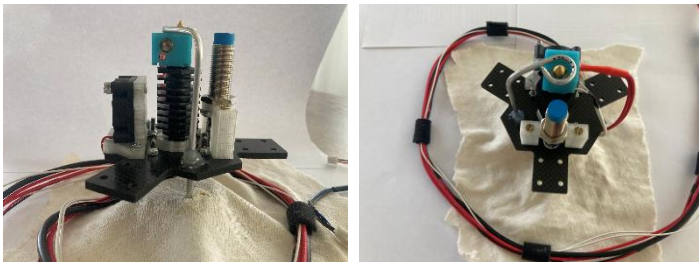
End platform equipped with an extruder, a fan, and an inductive sensor
